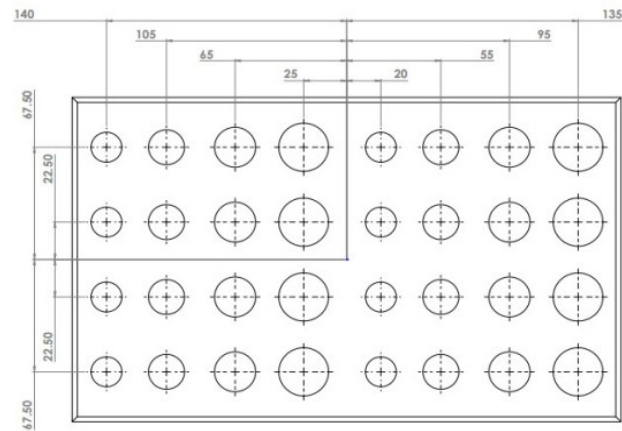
Schematic of view and dimensions of drilling tests (all dimensions are in mm)
